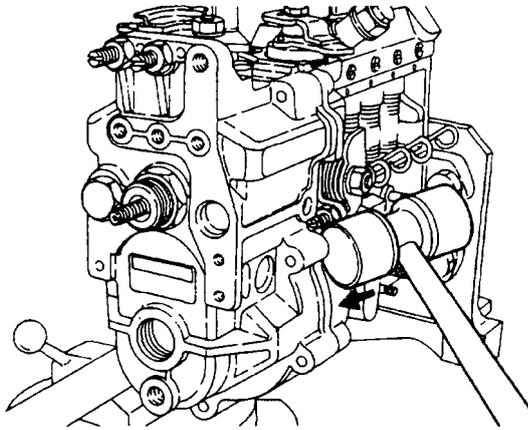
Removing the Torque Cam Rod Adjuster Plug
